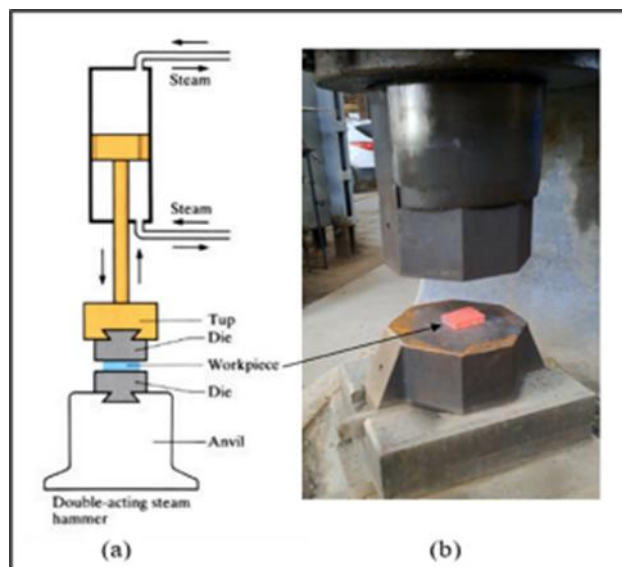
(a) Schematic representation of open die forging process (b) Open die forging process.
